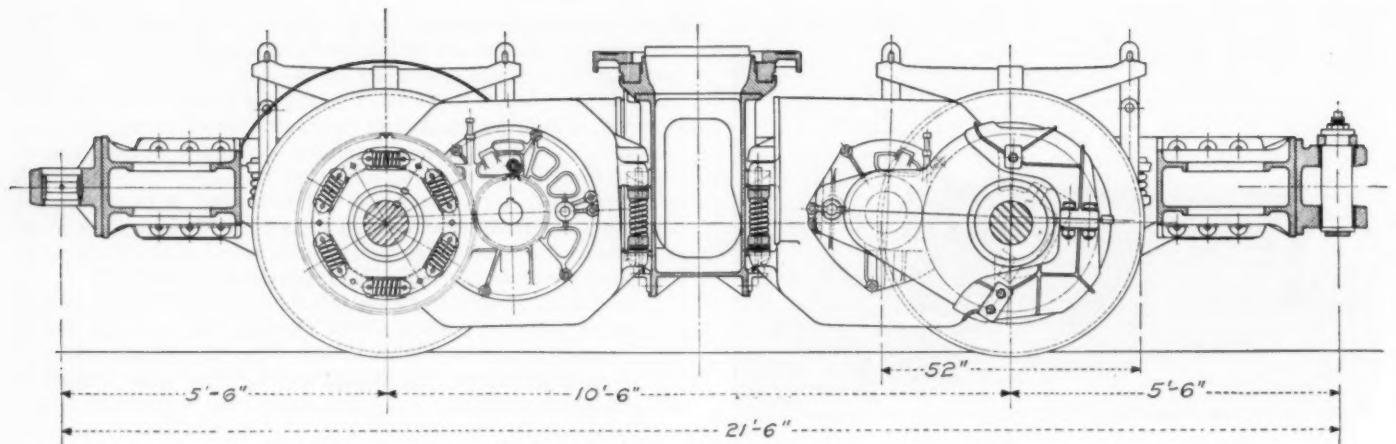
LONGITUDINAL SECTION SHOWING SPRING GEAR AND SPRING NOSE SUSPENSION OF LOCOMOTIVE SHOWN IN FIG. 3
